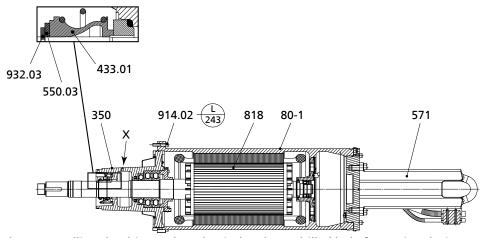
Installing the drive-end mechanical seal, X = drilled hole for testing device
